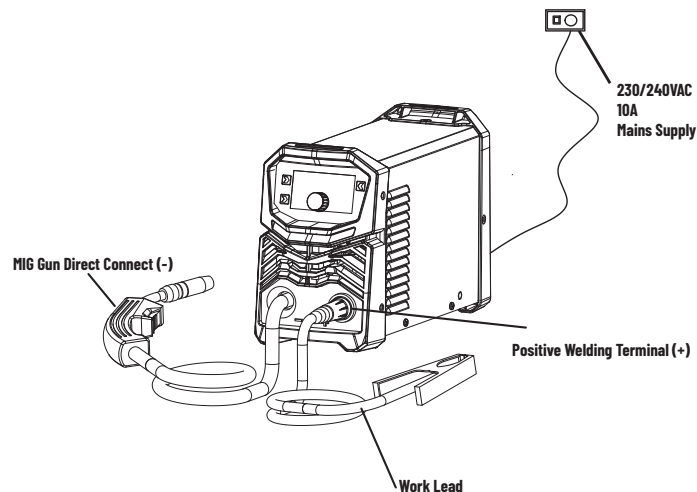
Setup for MIG Welding with Gasless MIG Wire
